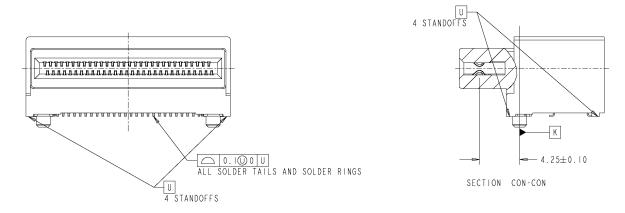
OSFP1600 SMT connector, datum and contact location
